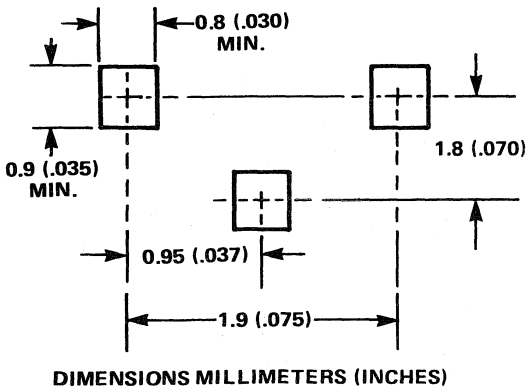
Mounting Pad Configuration for the SOT-23 Package.
